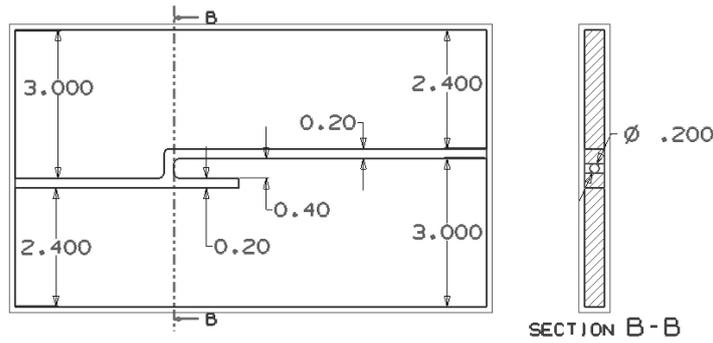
Drawing of cooling slot with axial hole (All dimensions are in inches)
